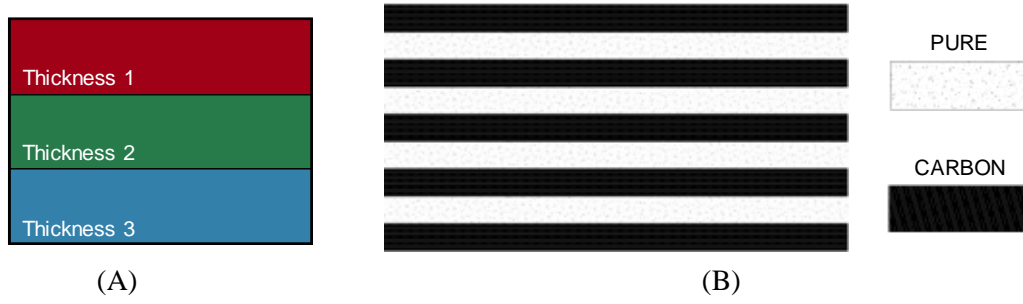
On the left-hand side (A) top view of the sheet used for the production of the specimens, on the right-hand side (B) example of the stacking sequence of the hybrid lamina used for the tensile and three-points bending specimens
